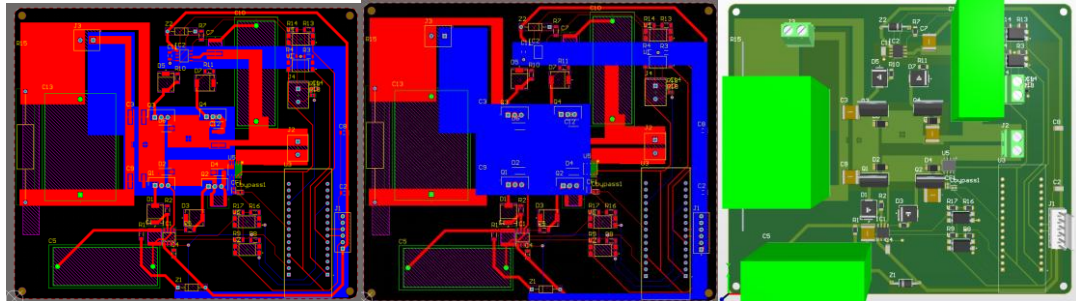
PCB top layer Figure 7.4.3: PCB Bottom layer Figure 7.4.4: 3D image of PCB
